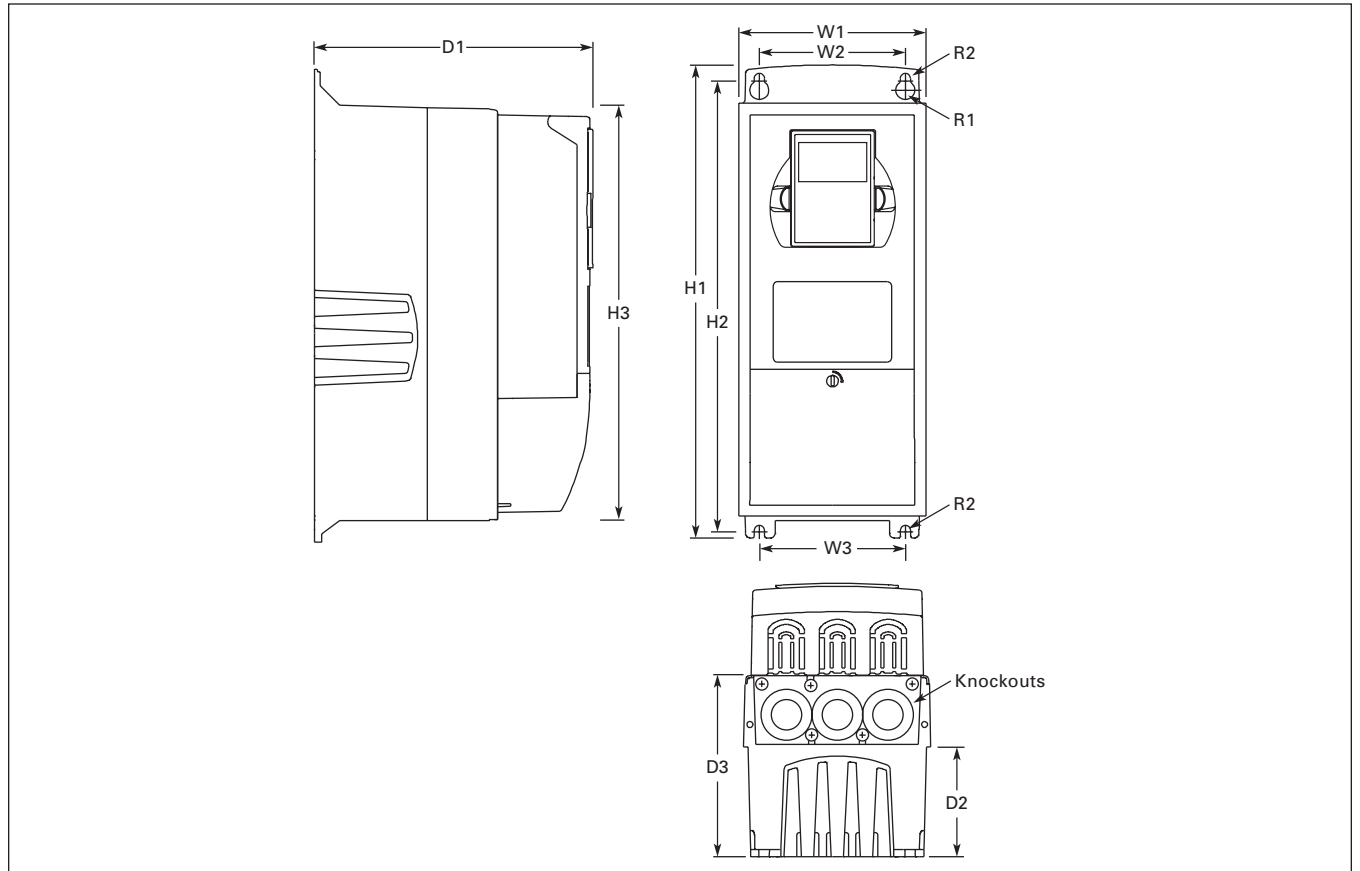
NEMA Type 1 and NEMA Type 12 SLX9000 Drive Dimensions, MF4 – MF6
